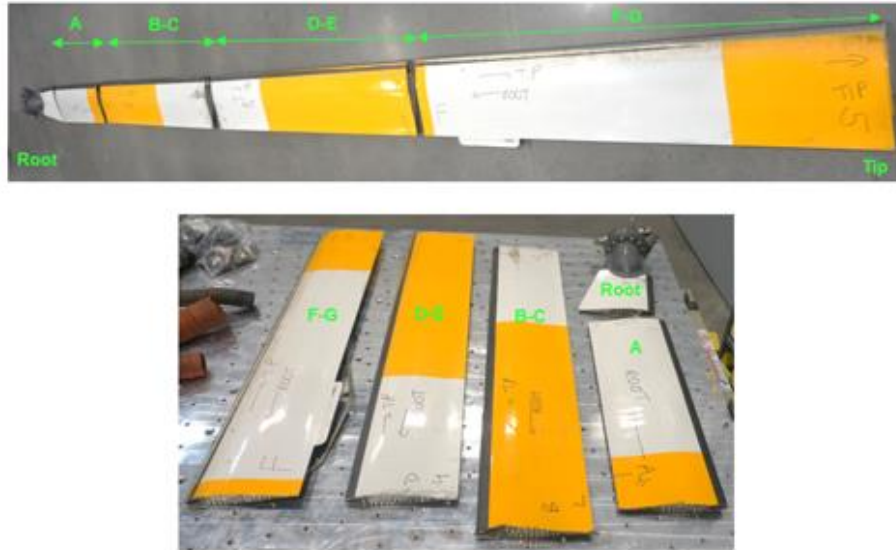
Part 27 Rotorcraft main rotor blade dissections.
